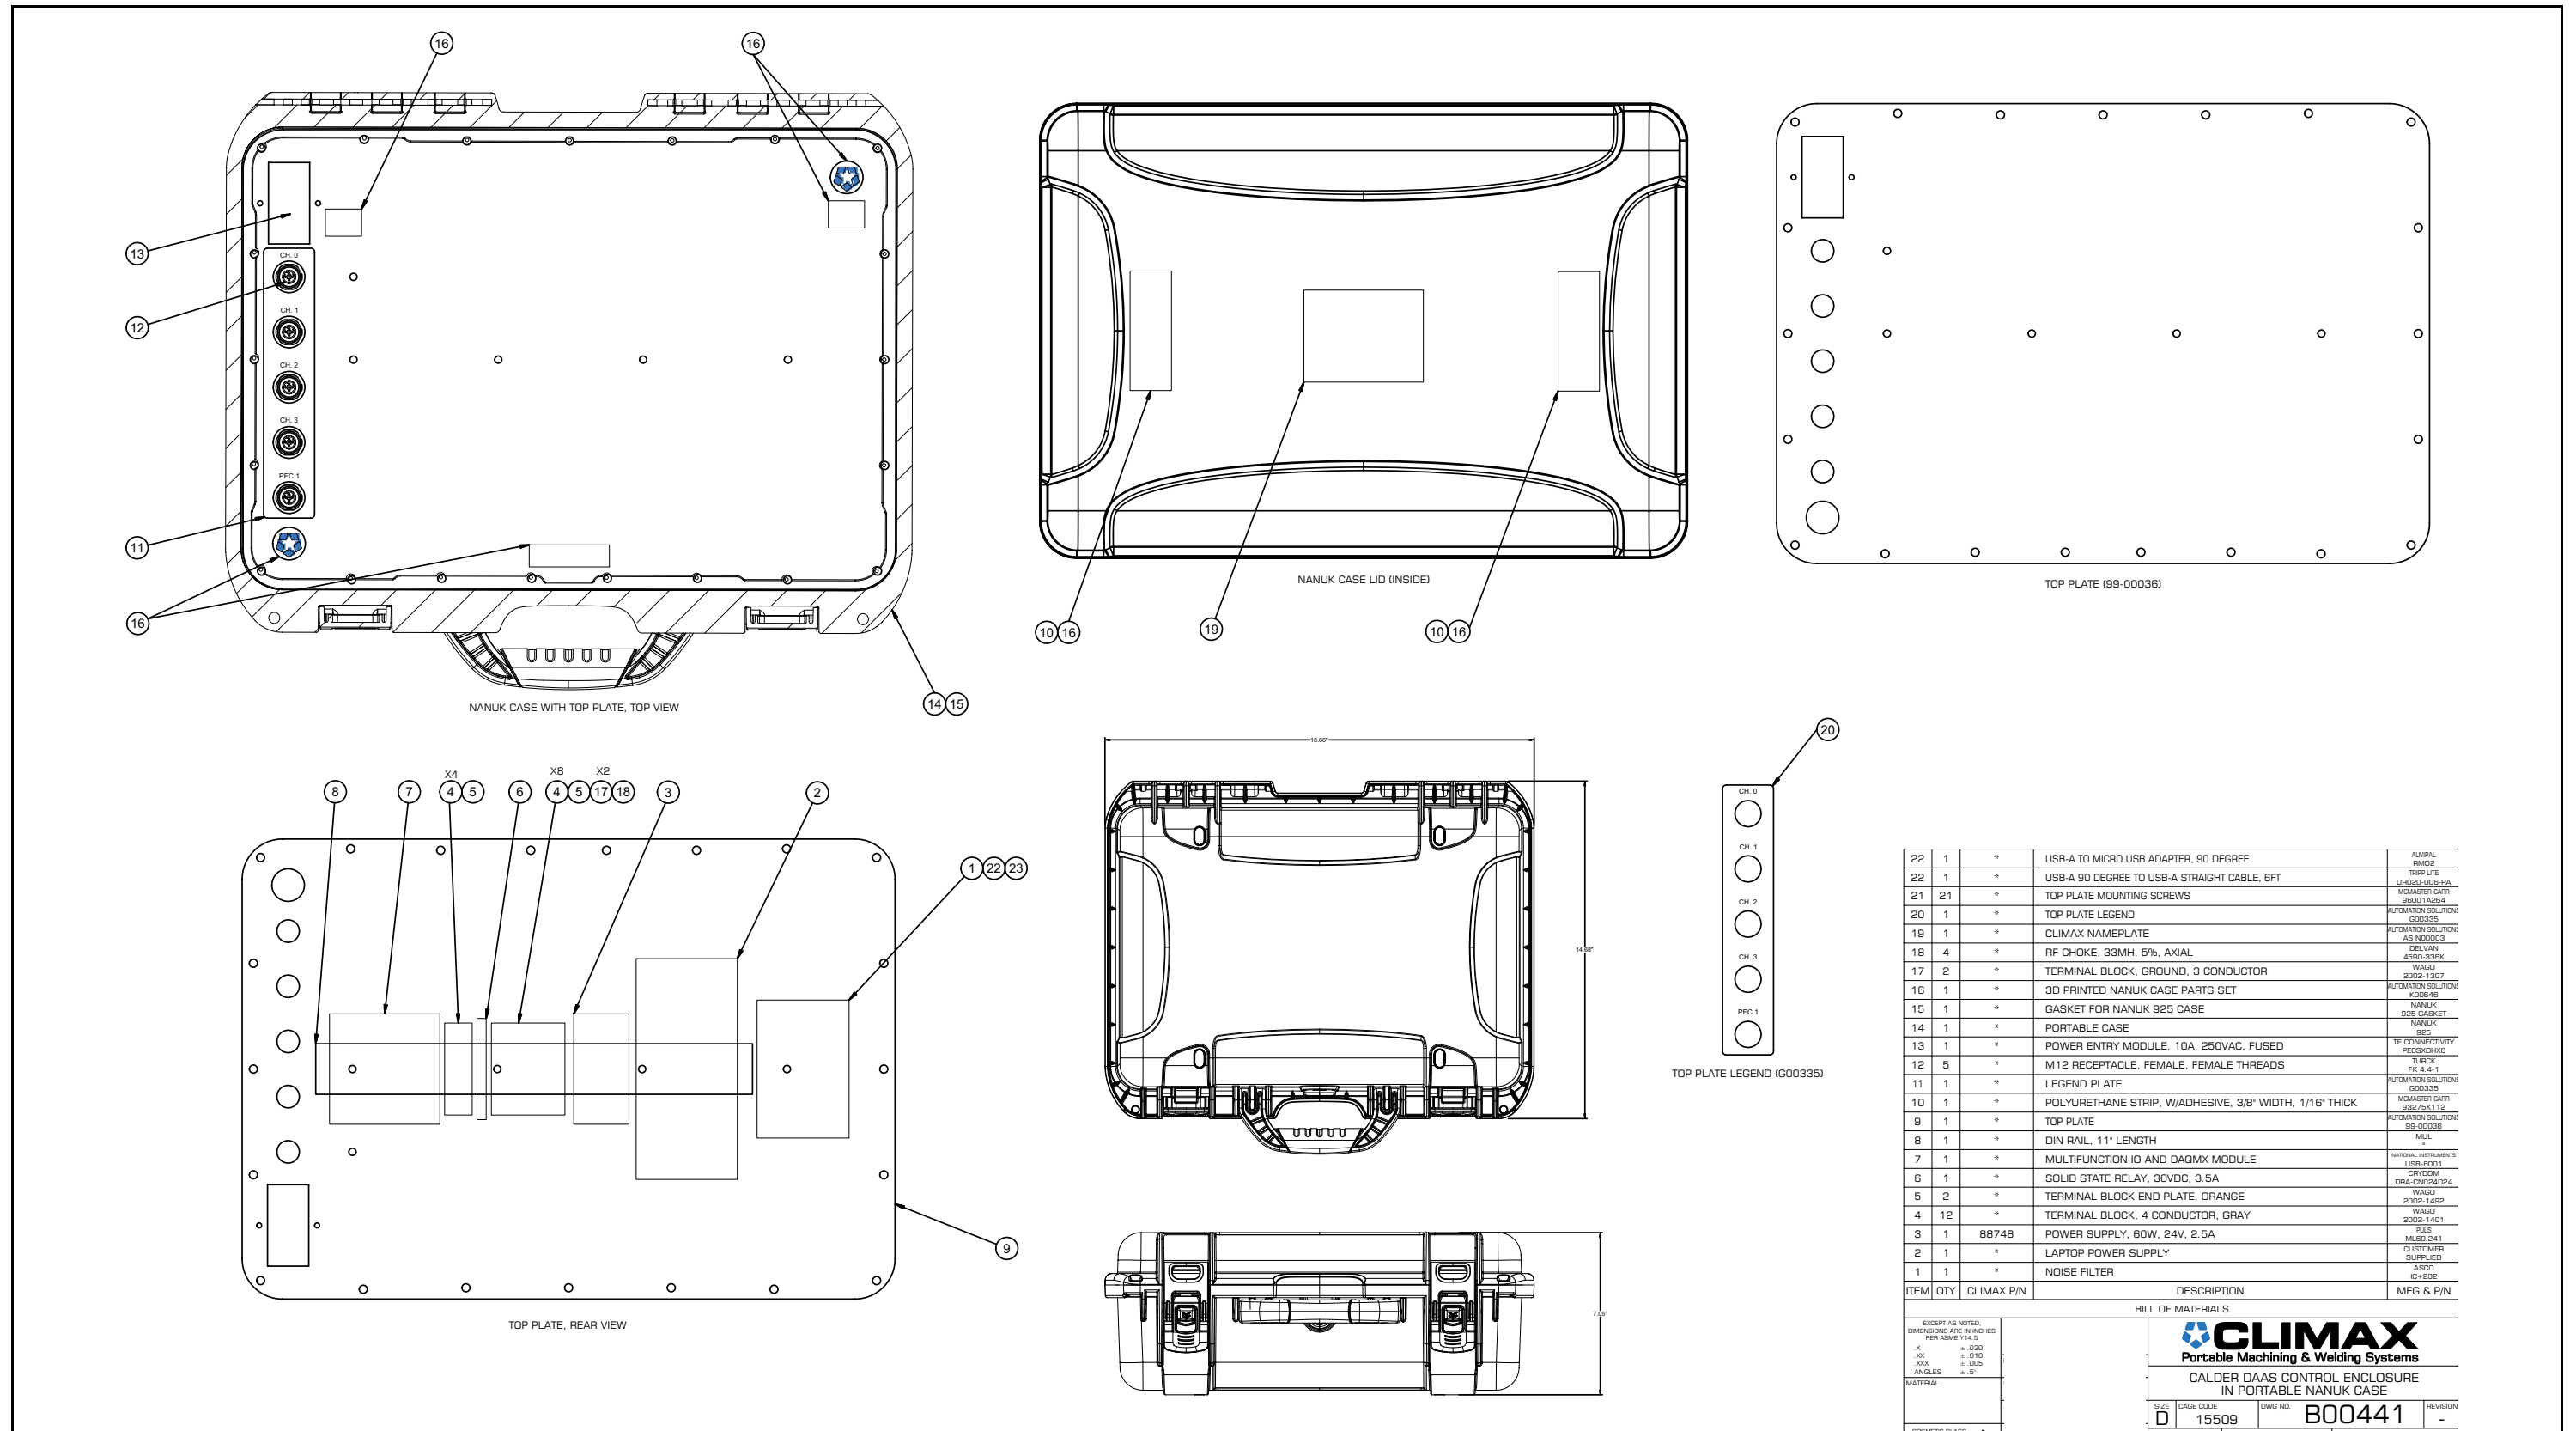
CONTROL ENCLOSURE ASSEMBLY (P/N B00441)
